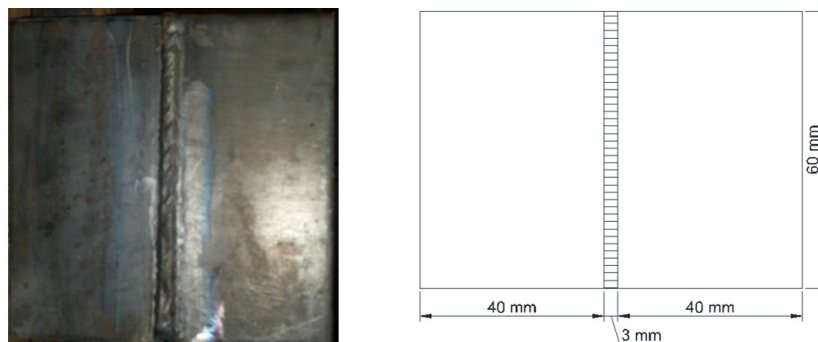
Welded Plate and the geometry of the 10 mm plates butt welded with a weld gap of 3 mm
